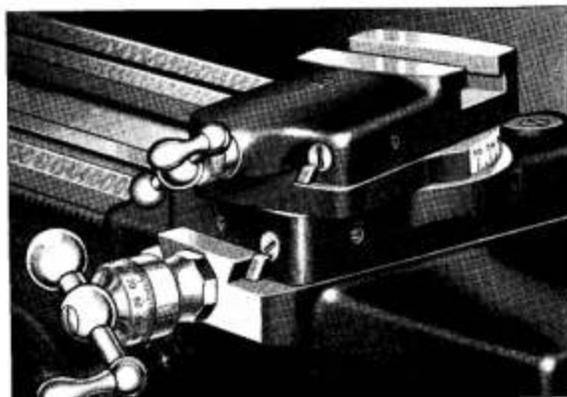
Close-up Showing Adjustable Tapered Gibs Used on Compound Rest Base and Top Dovetails of 10-inch and Larger South Bend Lathes
